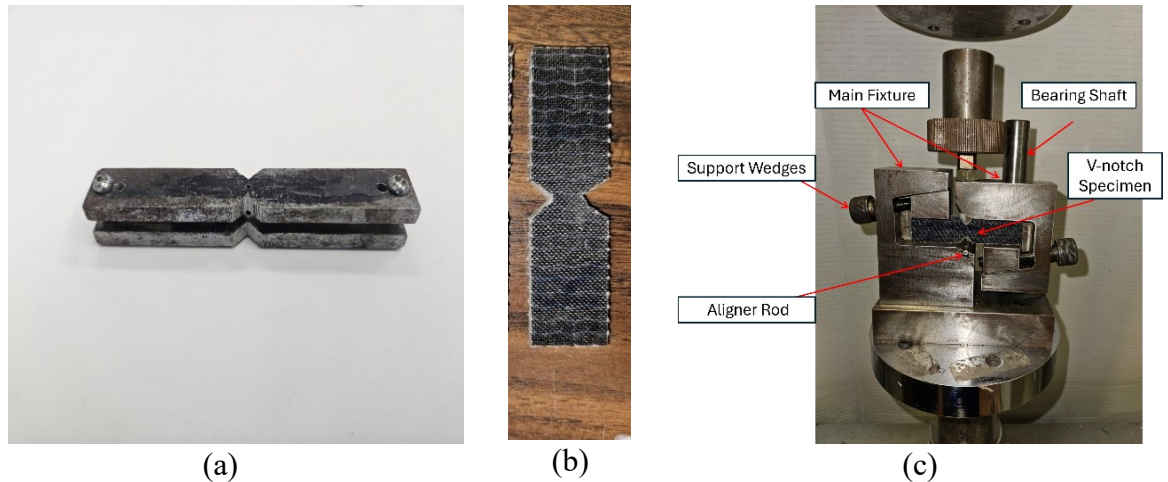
a) Fixture for coupon cutting, b) Shear test Coupon, c) Shear test assembly.
